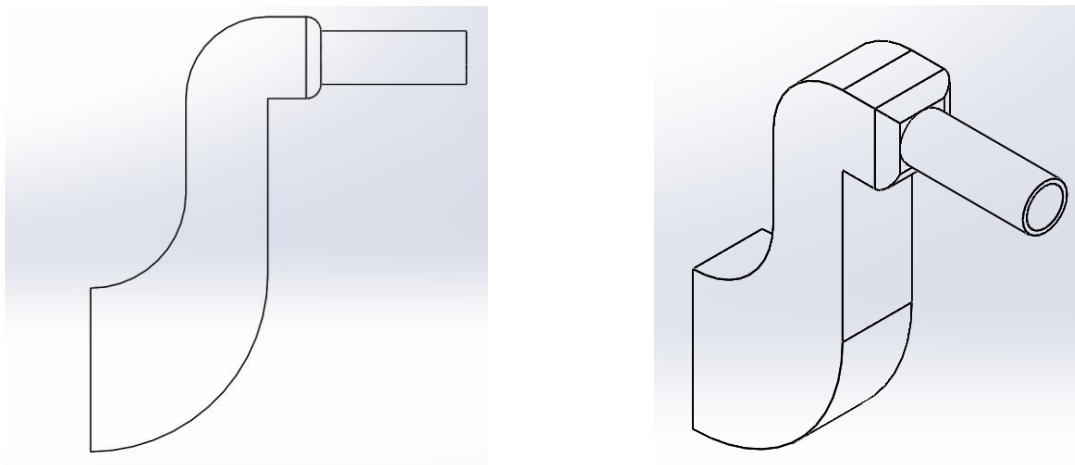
NCAT OWC Exterior Design CAD Drawings, Front View (Left) and Isometric 3D View (Right).
